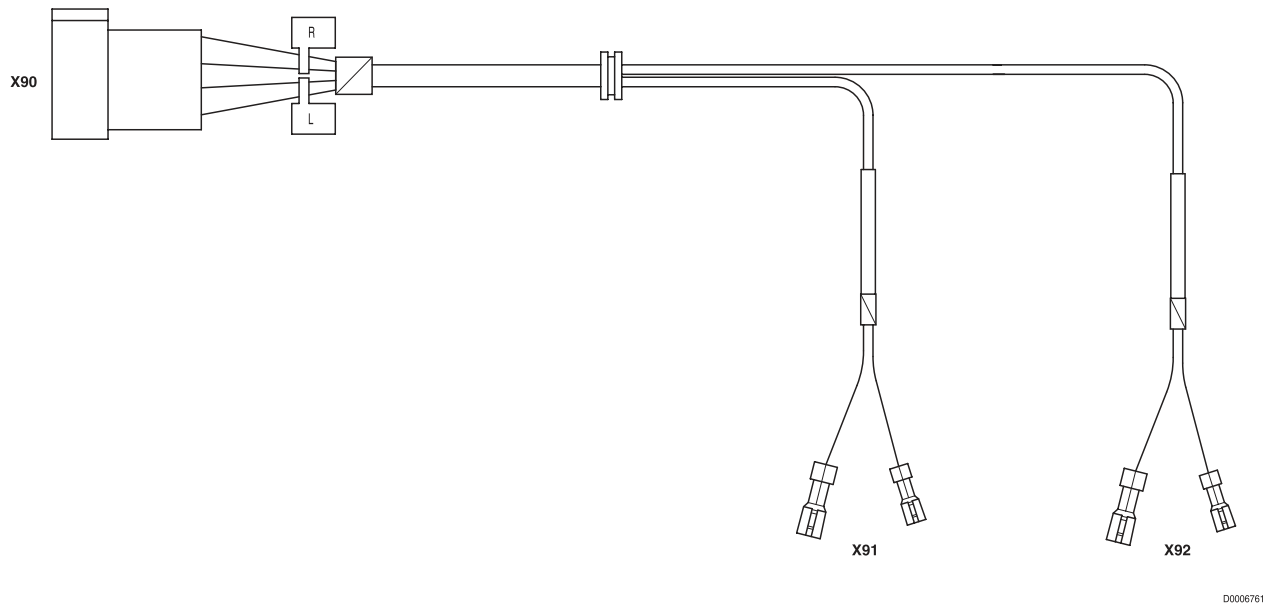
Loudspeaker wiring - Tractor with standard cab
